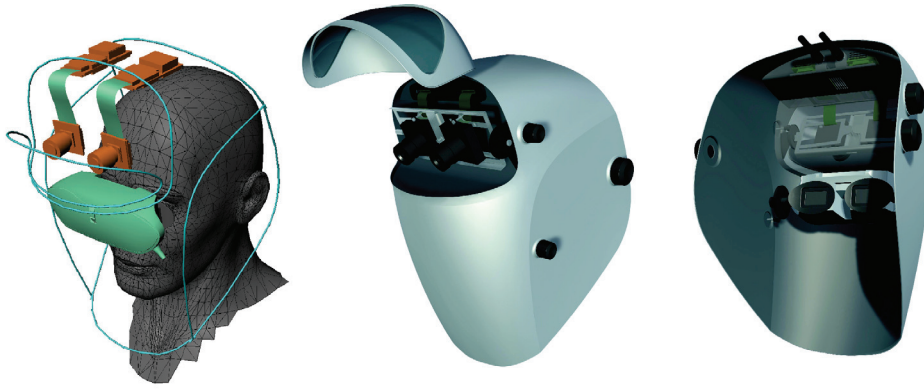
Conceptional Setup of the TEREBS welding helmet
